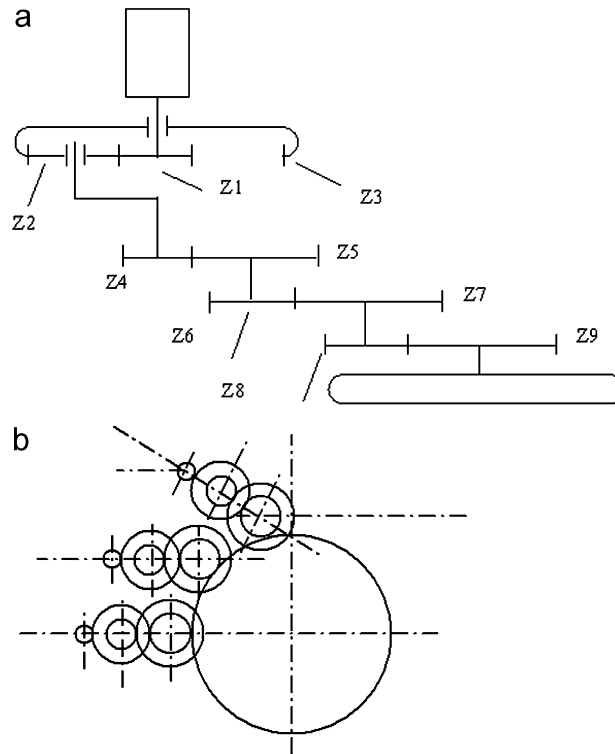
(a) Part of driving system for a bucket wheel with planetary gearbox (gears: z_1 -sun, z_2 -planet, z_3 -stationary rim, z_4 - z_9 three-stage cylindrical gearbox) and (b) three independent drives of bucket wheel.
